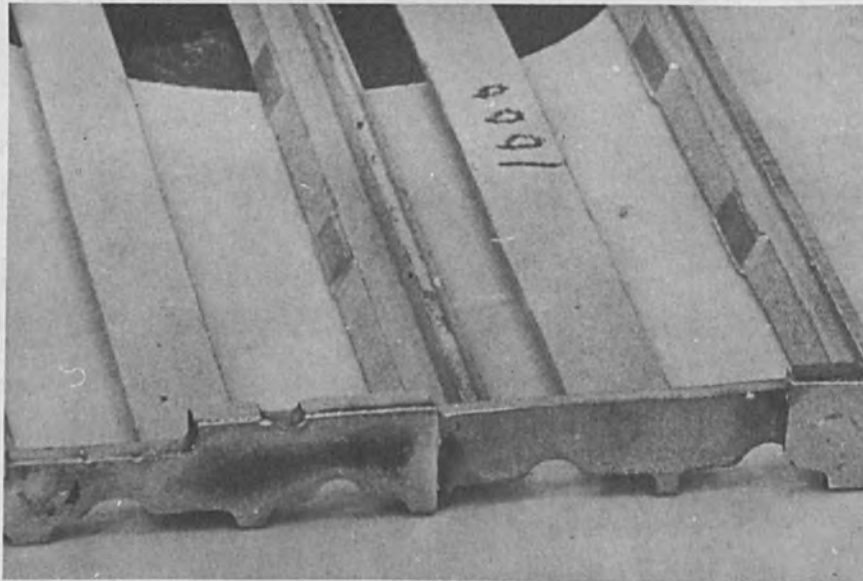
EB welder used to build up undercut area of aluminum cast frame.
